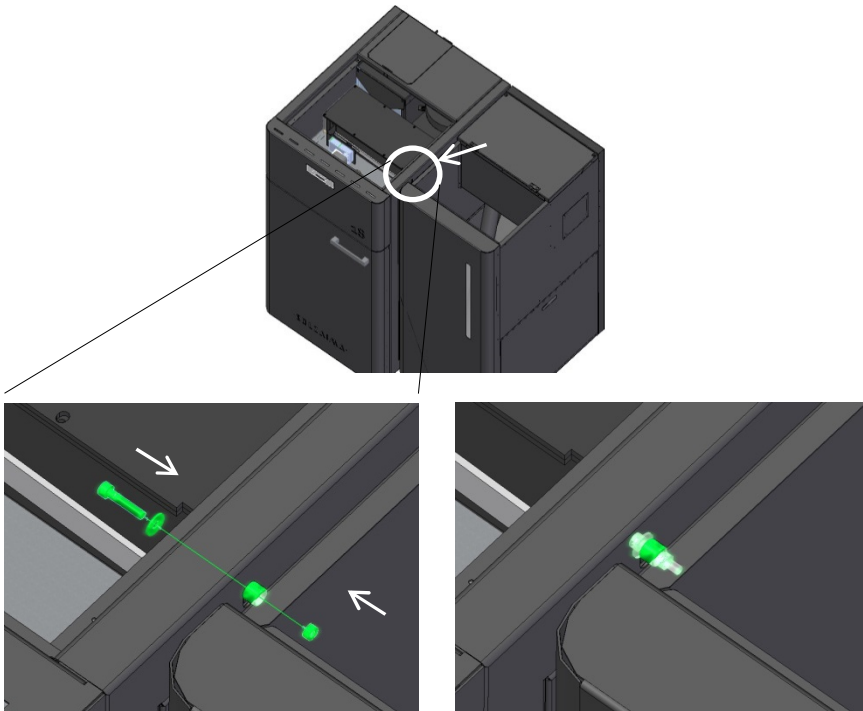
Attaching and securing the storage unit to the boiler – Side view
